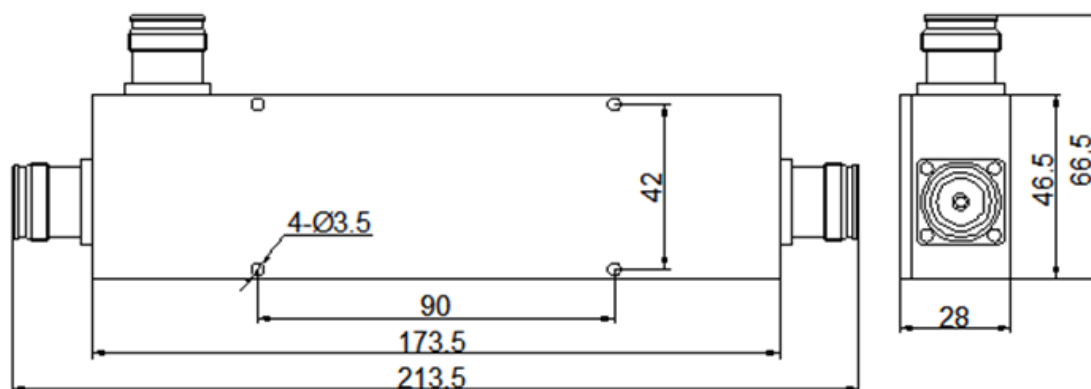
JX-DC-340M3800M-4310Fx front panel layout
